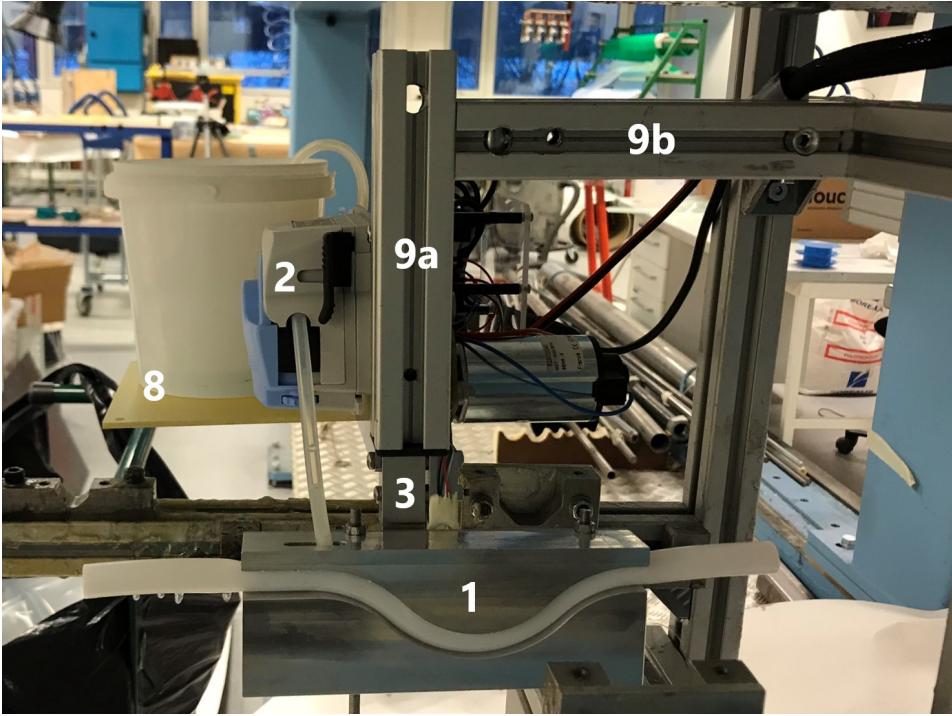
Side view of resin dosing system, as installed in the winding machine carriage
